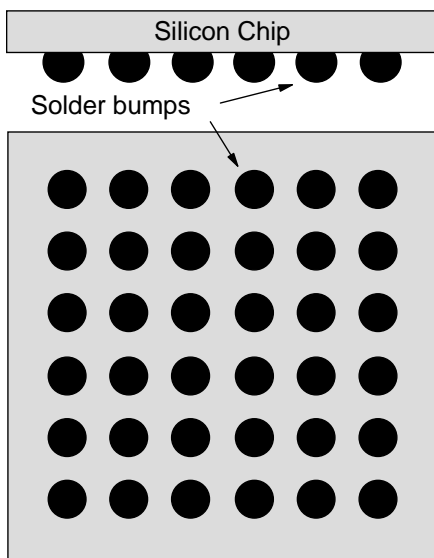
Flip chip device: side view (top), bottom view (bottom)
